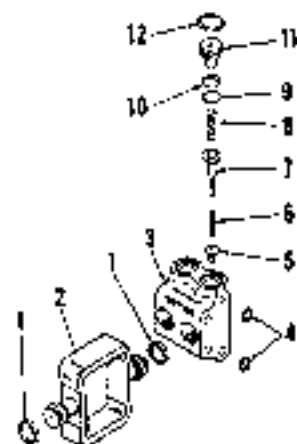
Exploded view of valve chamber and associated parts showing poppet type inlet and outlet valves.
